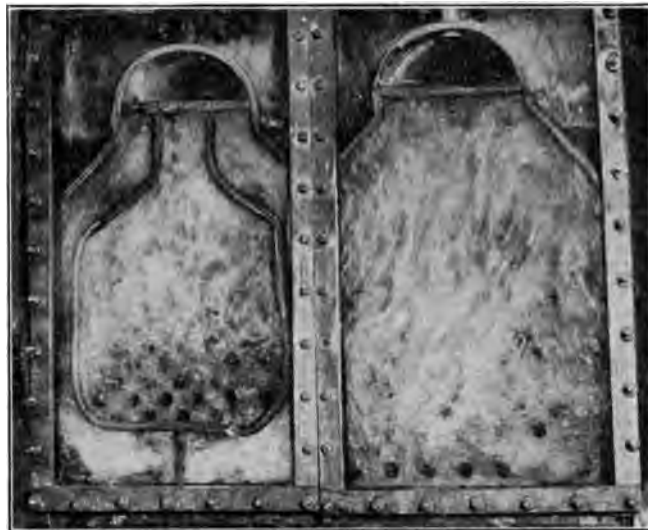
SHOWING FRONT HEADERS; LOAD 500 PER CENT; SETTING AS IN FIG. 8a
